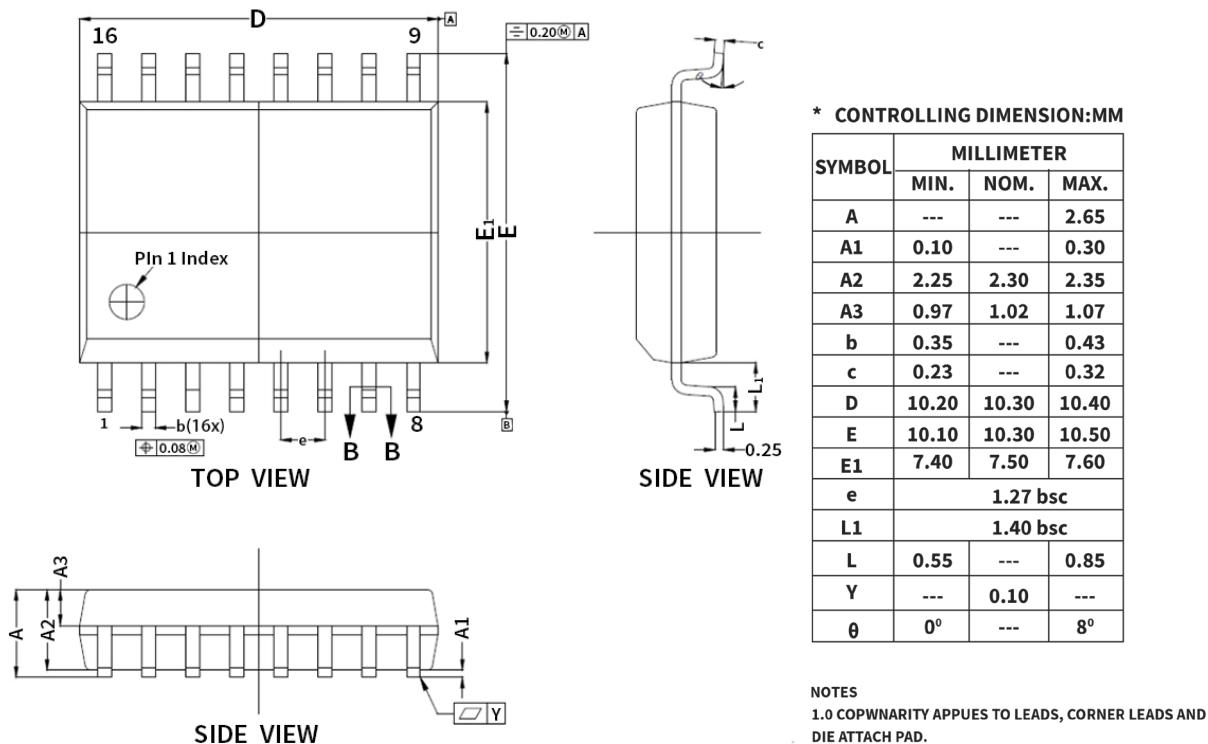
SOW16 Package Shape and Dimension in millimeters
